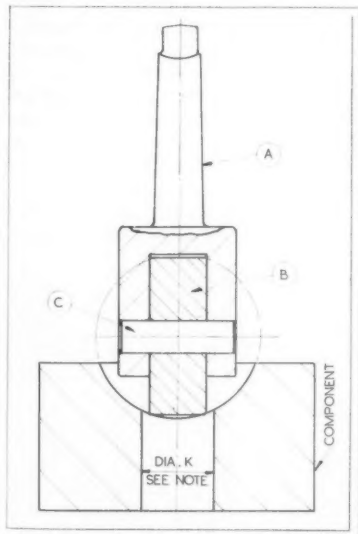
Roller type cutter showing clearance with the hole at the bottom of the seating. Note, diameter K is larger than the width of the cutter.
